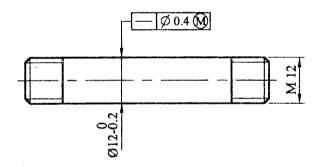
(a) - Straightness tolerance of an axis
